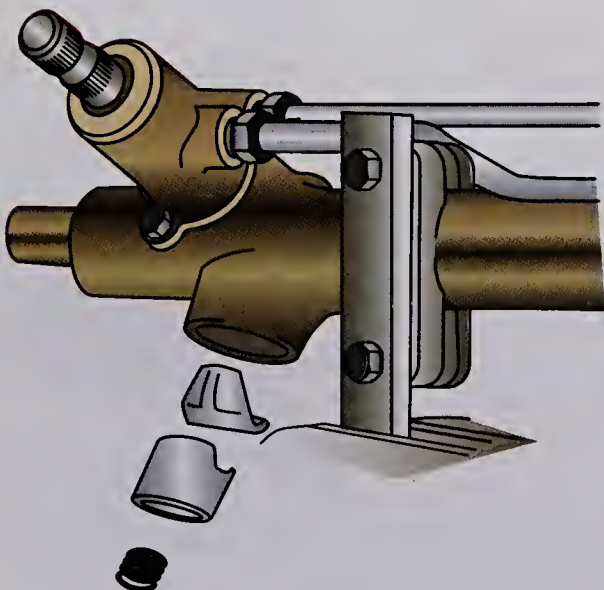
Installing rack guide seat, rack guide, and spring.
